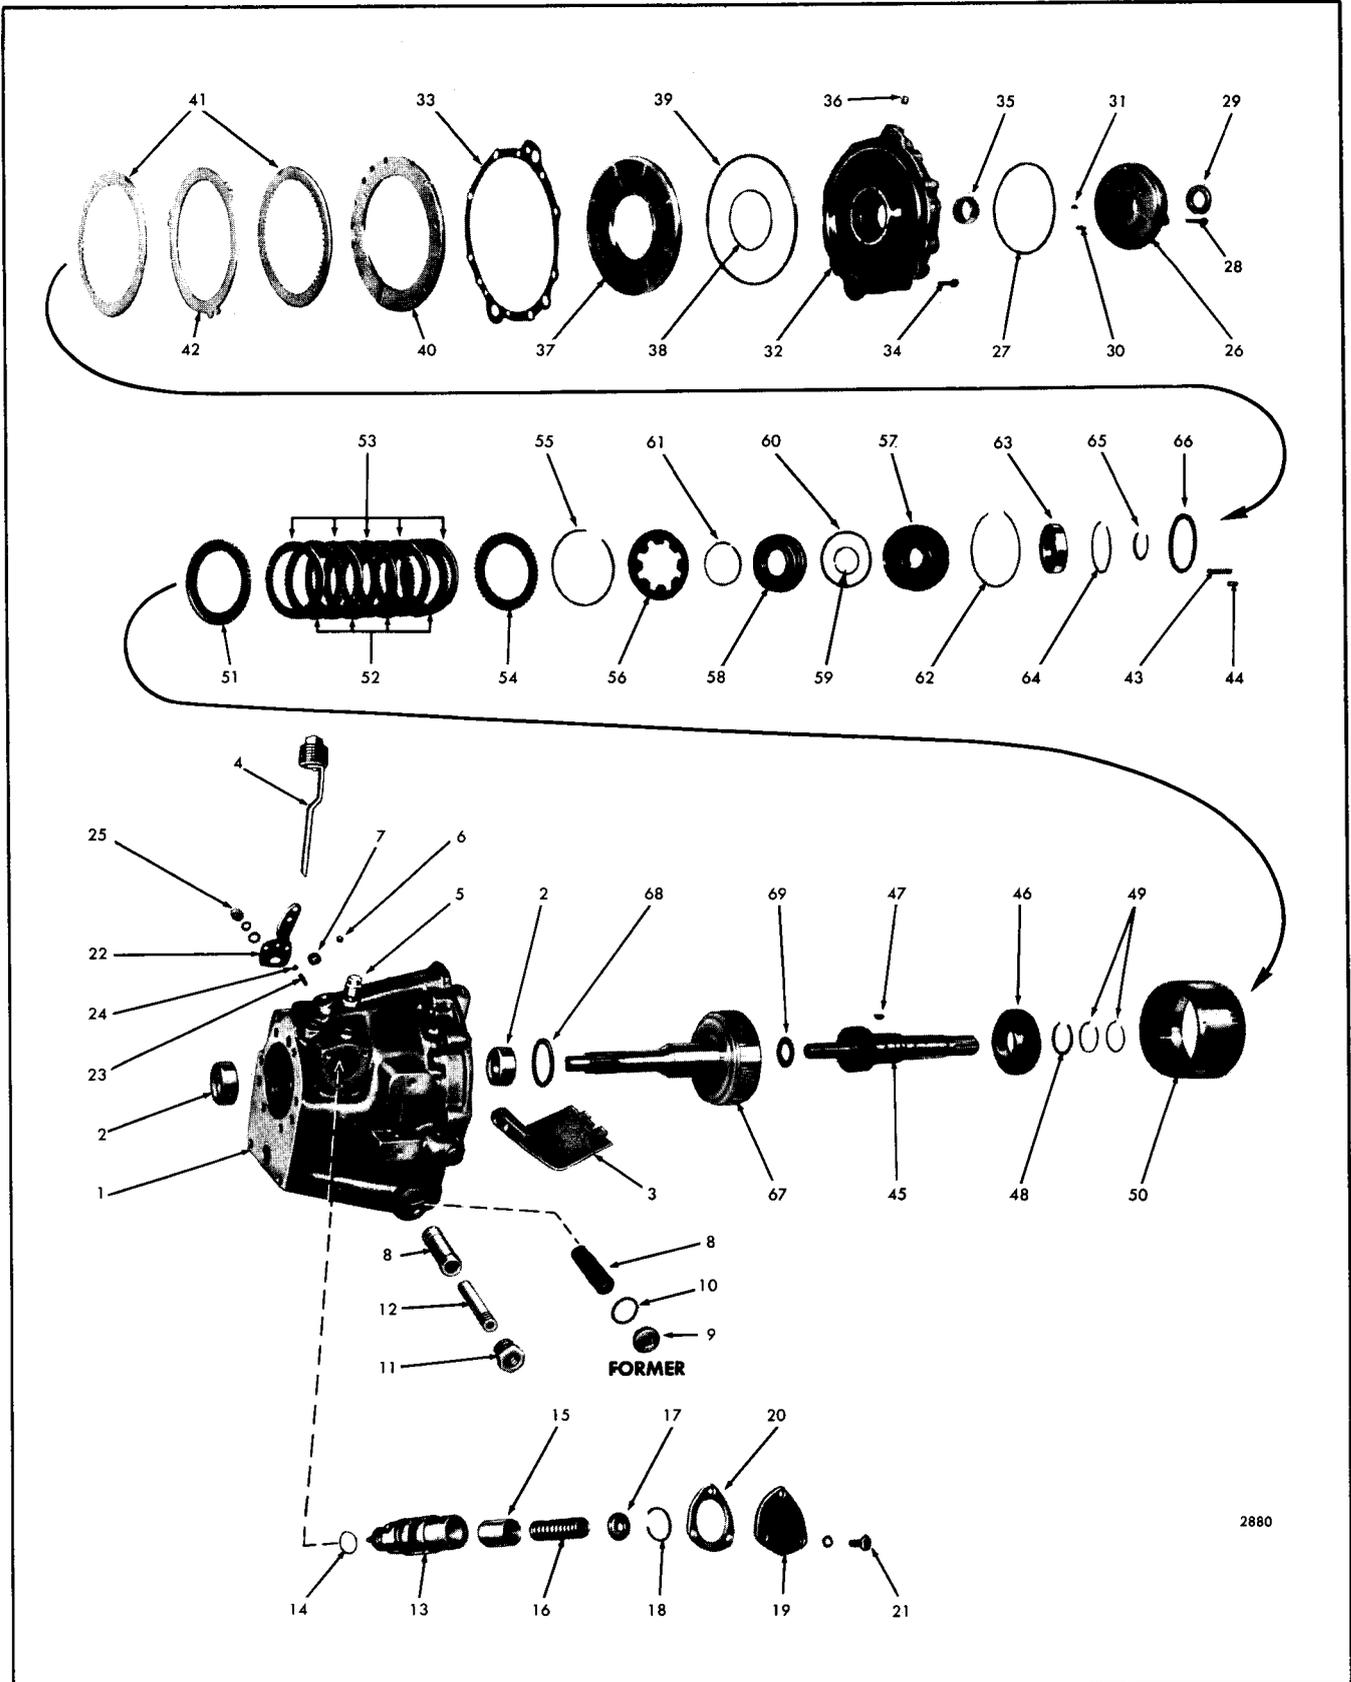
Reverse Gear Details and Relative Location of Parts (2.1:1 Ratio Model 71C Shown)
